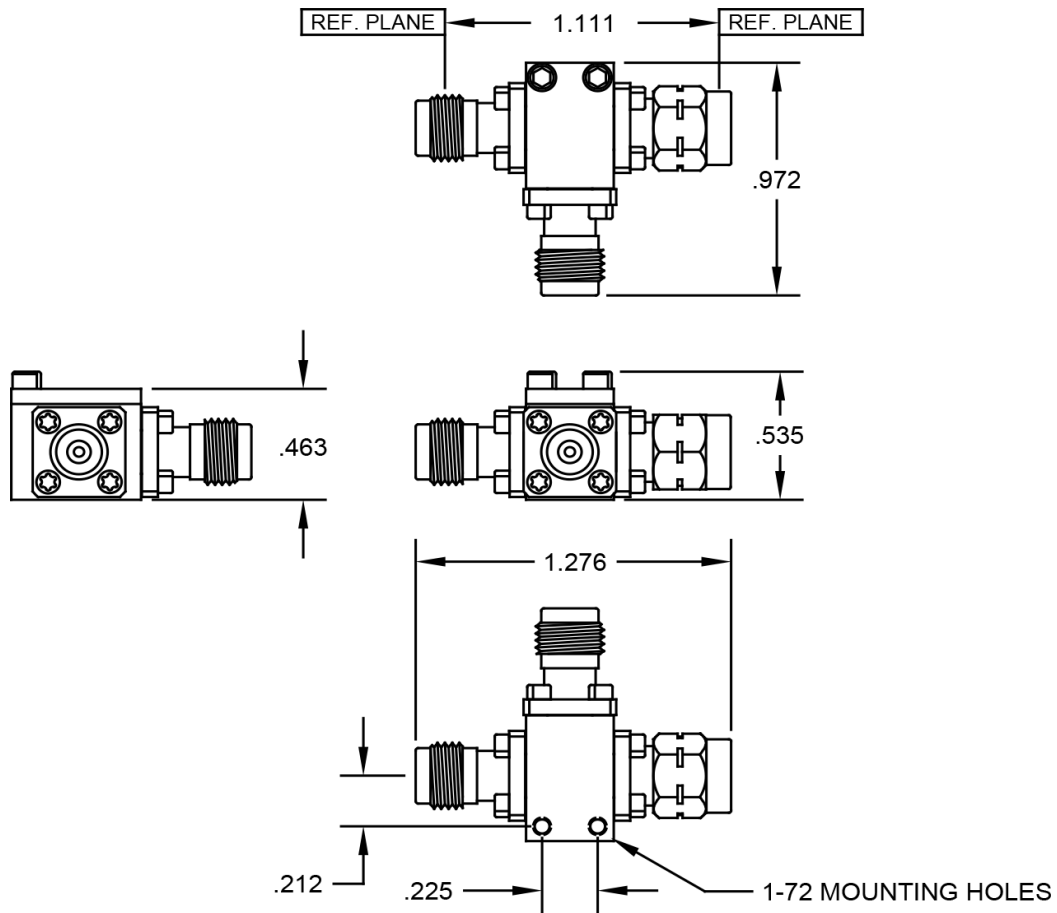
HL9565 mechanical drawing (opt. -JPJ)
